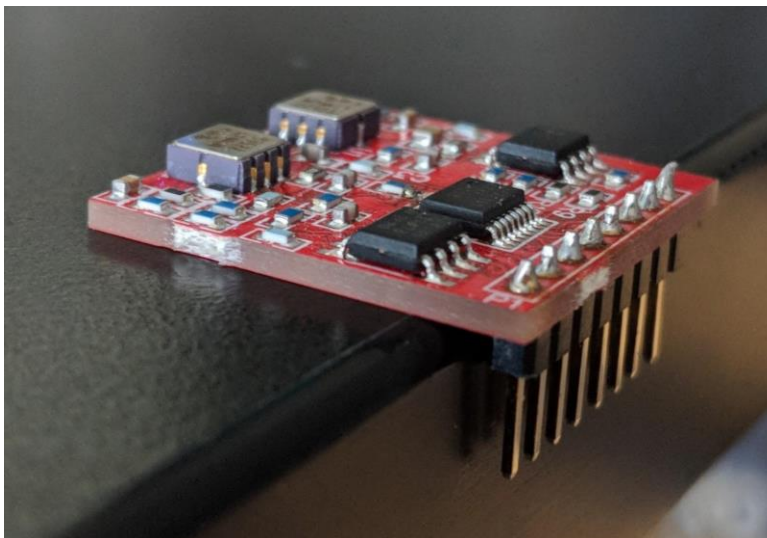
Side view of the accelerometer with pins showing the relative z-sizes of parts
